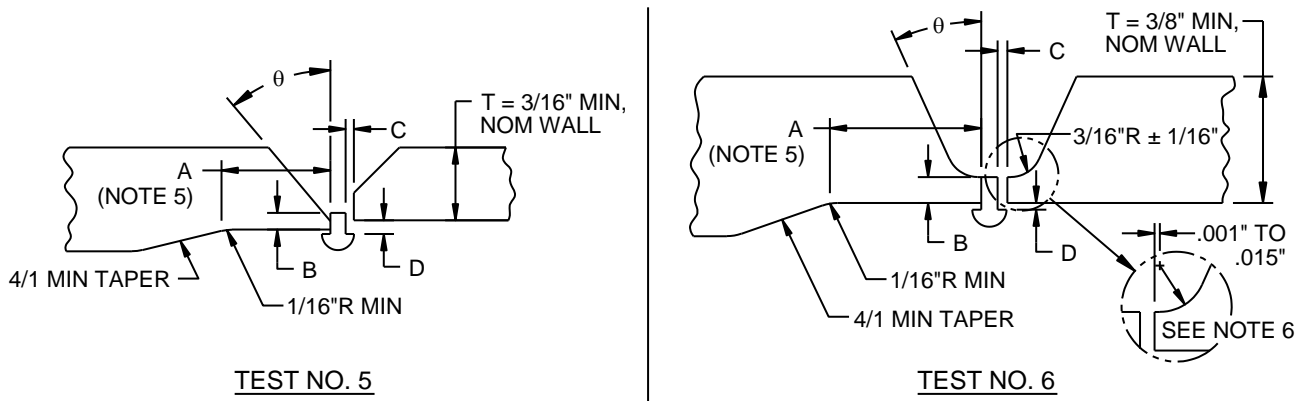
Typical Layout and Construction for Restricted Accessibility Qualification Test Assembly Positions
